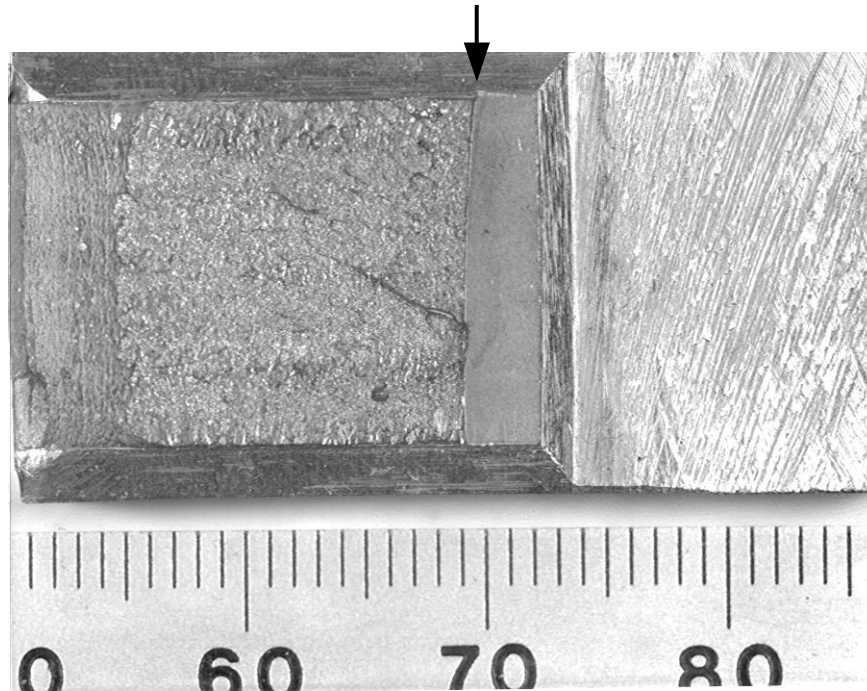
Fracture Face of a SEN(B) Specimen S9 from SMAW. This Fatigue Crack Front is Marked by the Arrow
